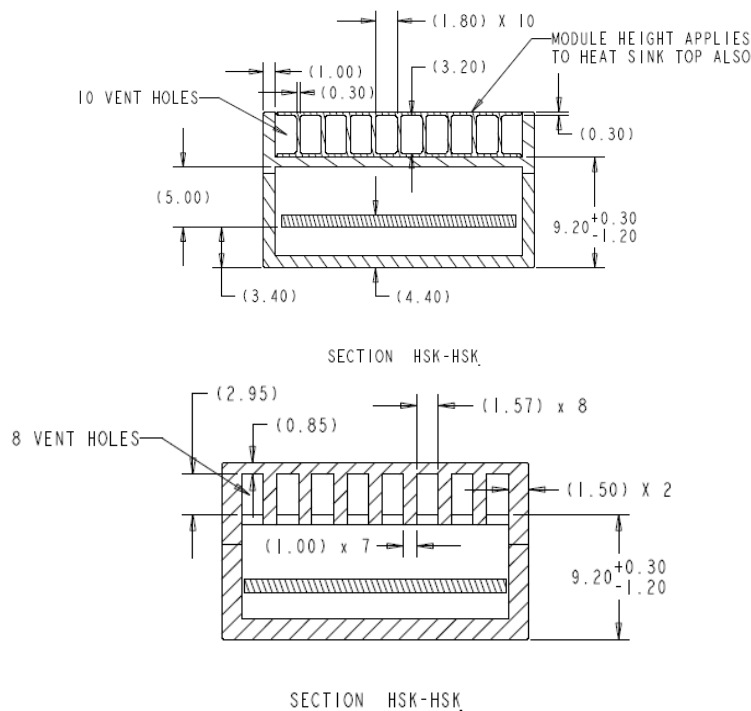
Examples of heat sink design (See Figure 12 for cross-section location)
